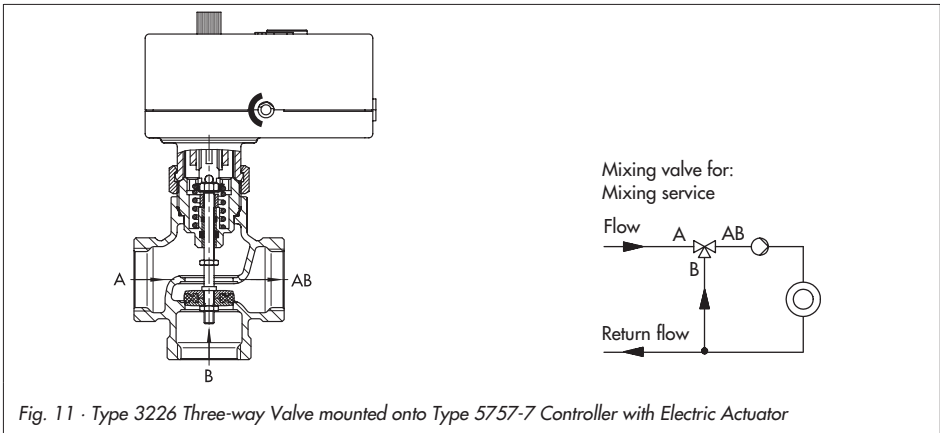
· Type 3226 Three-way Valve mounted onto Type 5757-7 Controller with Electric Actuator
